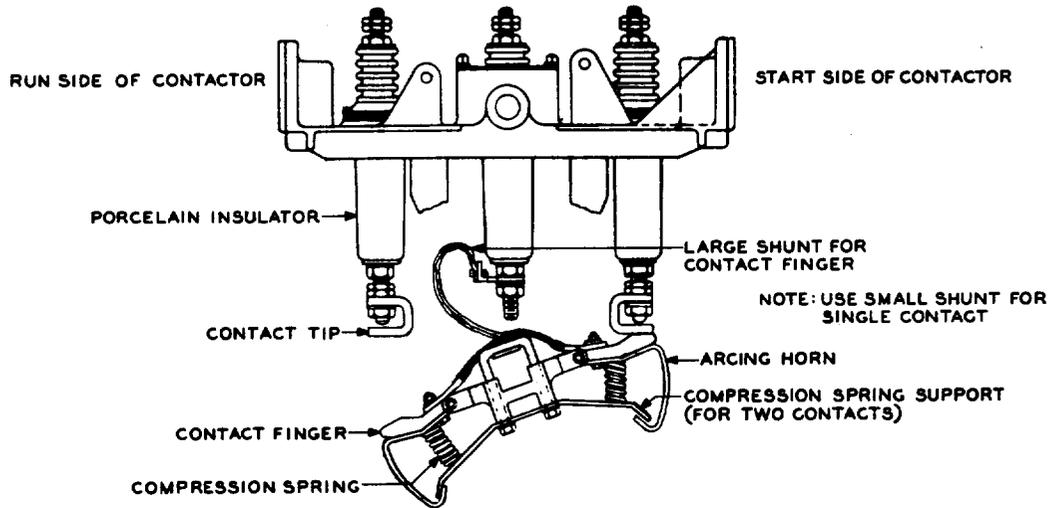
Contactor Mechanism on Form K22 Starter - In Start Position
